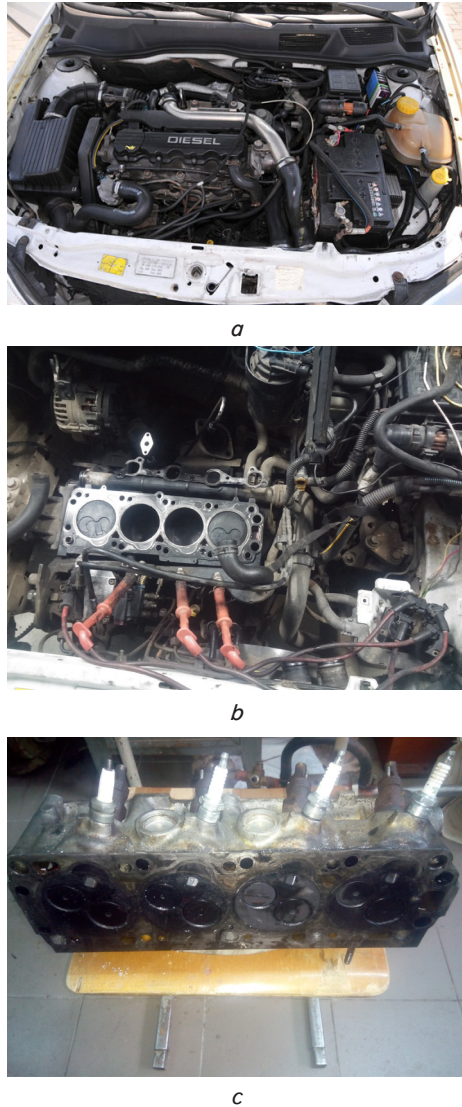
Opel Astra passenger car with the gas-converted diesel engine: *a* – X17DTL engine; *b* – the engine with the dismantled head and installed ignition system; *c* – the head of the converted engine with plugs and diesel nozzles
